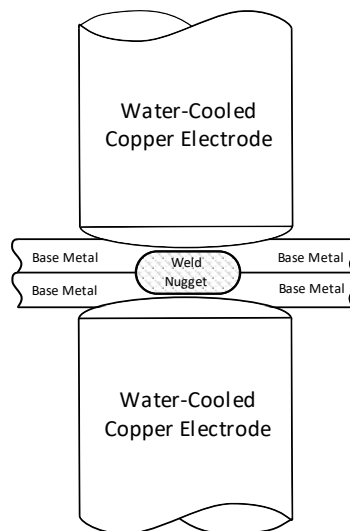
Spot weld illustration depicting two electrodes, two stock sheets, and a fused weld nugget [45].
